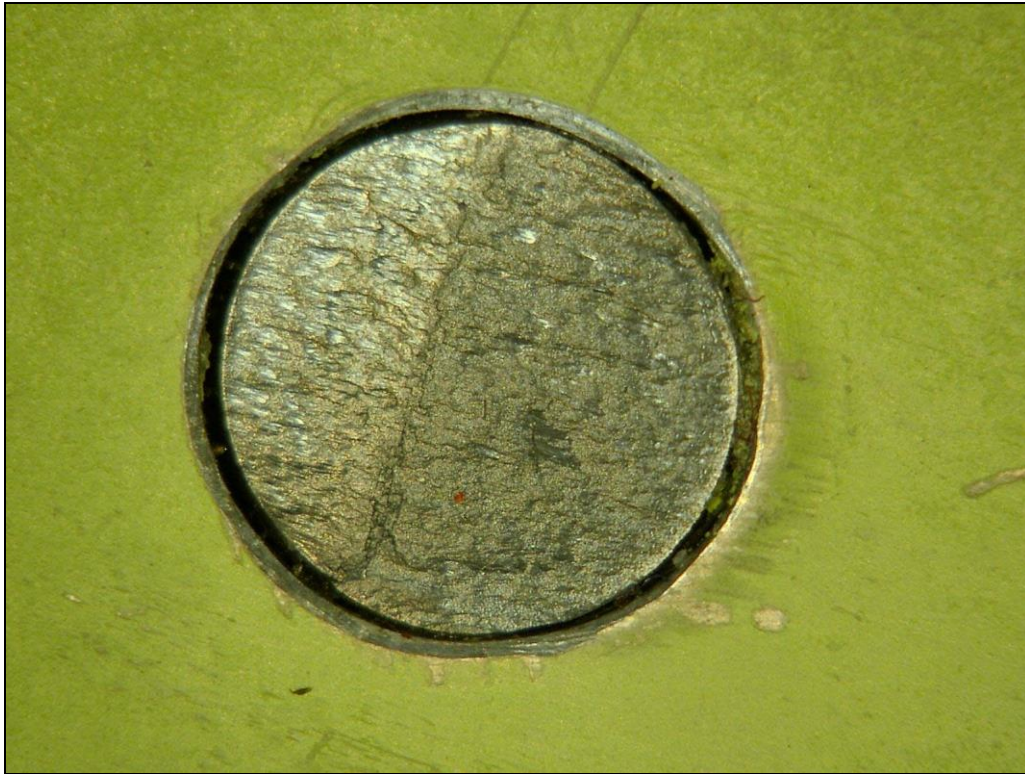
Main PCU lower bracket fastener shear (*NTSB*)
